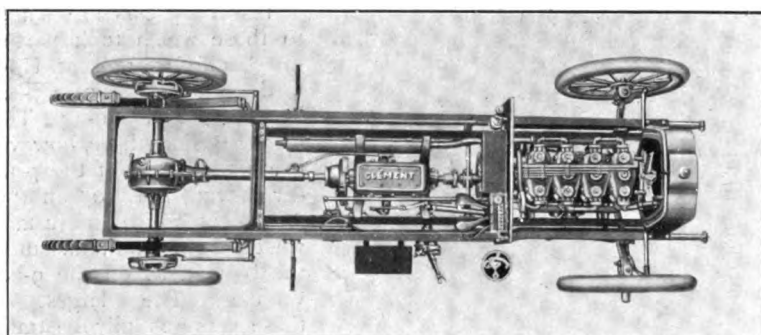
Plan view of the 16-20-h.p. Clement Chassis.
